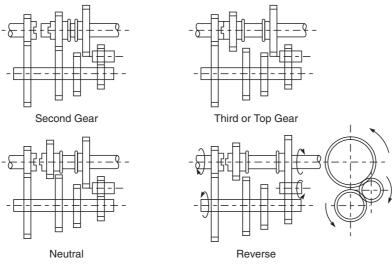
Different Positions of Gears for a Sliding Mesh Gearbox
